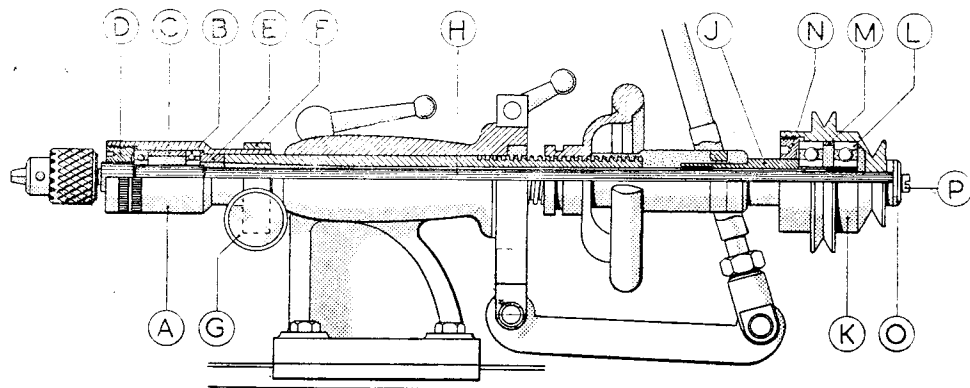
General arrangement of the tailstock drilling spindle. "A"—body; "B"—ball-races; "C"—sleeve; "D"—screwed collar; "E"—shouldered collar; "F"—clamp; "G"—clamp-screw; "H"—spindle; "J"—driving pulley adapter; "K"—hub; "L"—ball-races; "M"—distance-piece; "N"—screwed collar; "O"—dog; "P"—locking-screw
